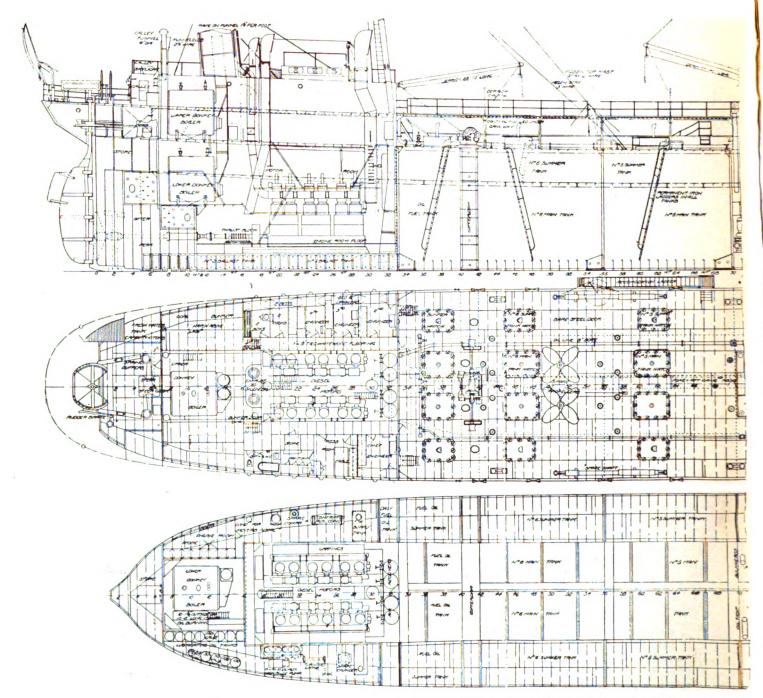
INBOARD PROFILE AND DECK PLANS OF
